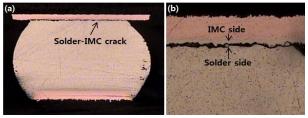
Cross sectional view of solder-IMC crack.
